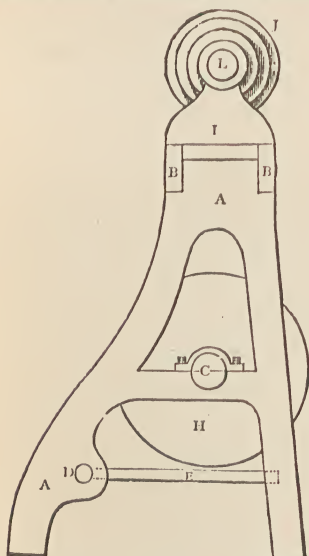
THE FOOT LATHE (SIDE VIEW).
